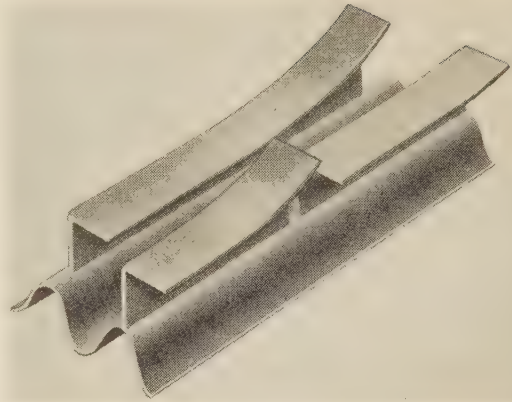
DETAIL SHOWING FINS AND DEFLECTORS WELDED TO CORRUGATED SURFACE
